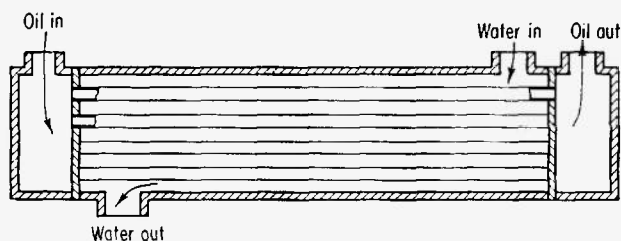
Shell and Tube Single-pass Heat Exchanger
